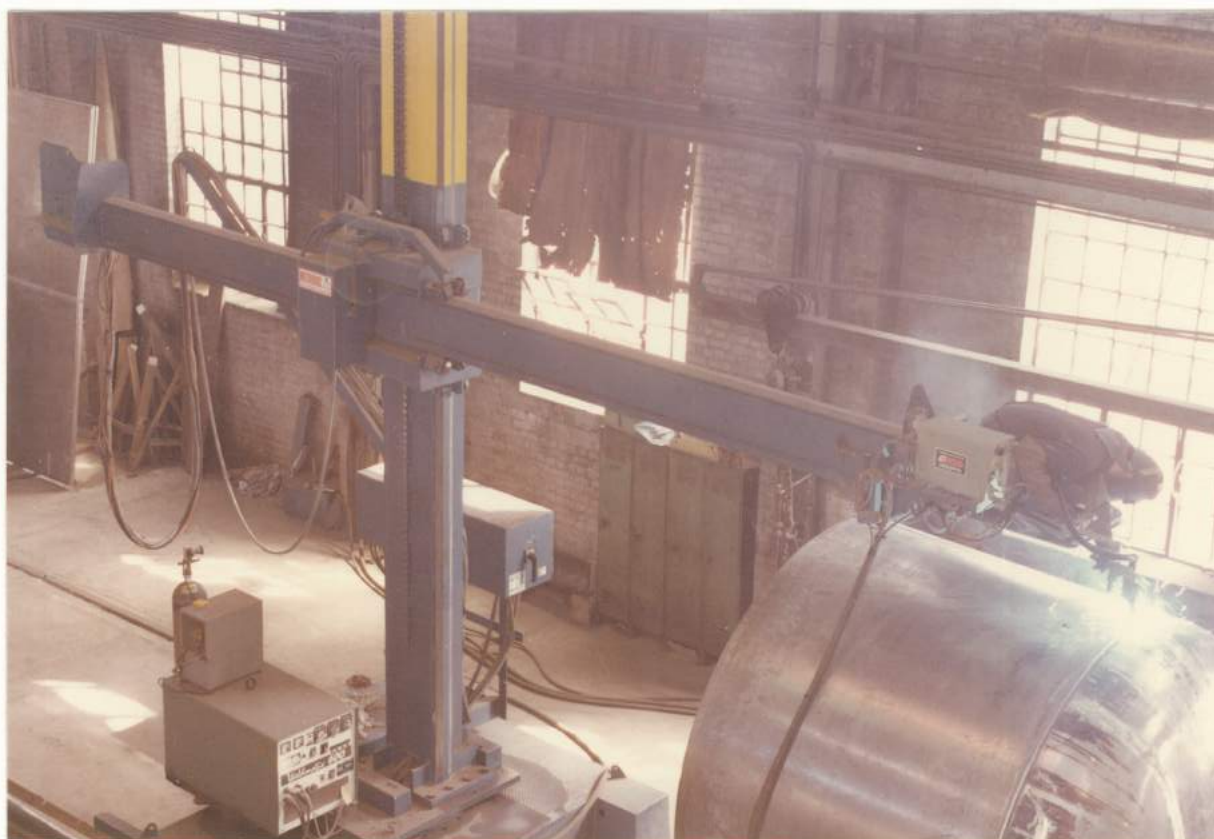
Senior Automatic Welding Manipulator (Boom Welder)
